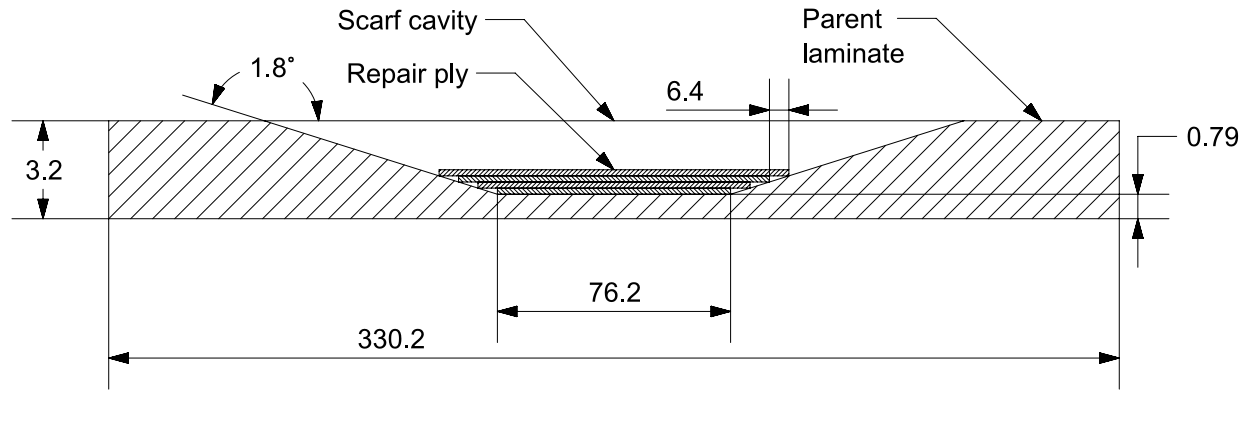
Cross-section of the parent laminate tool, dimensions in mm. Not to scale.
